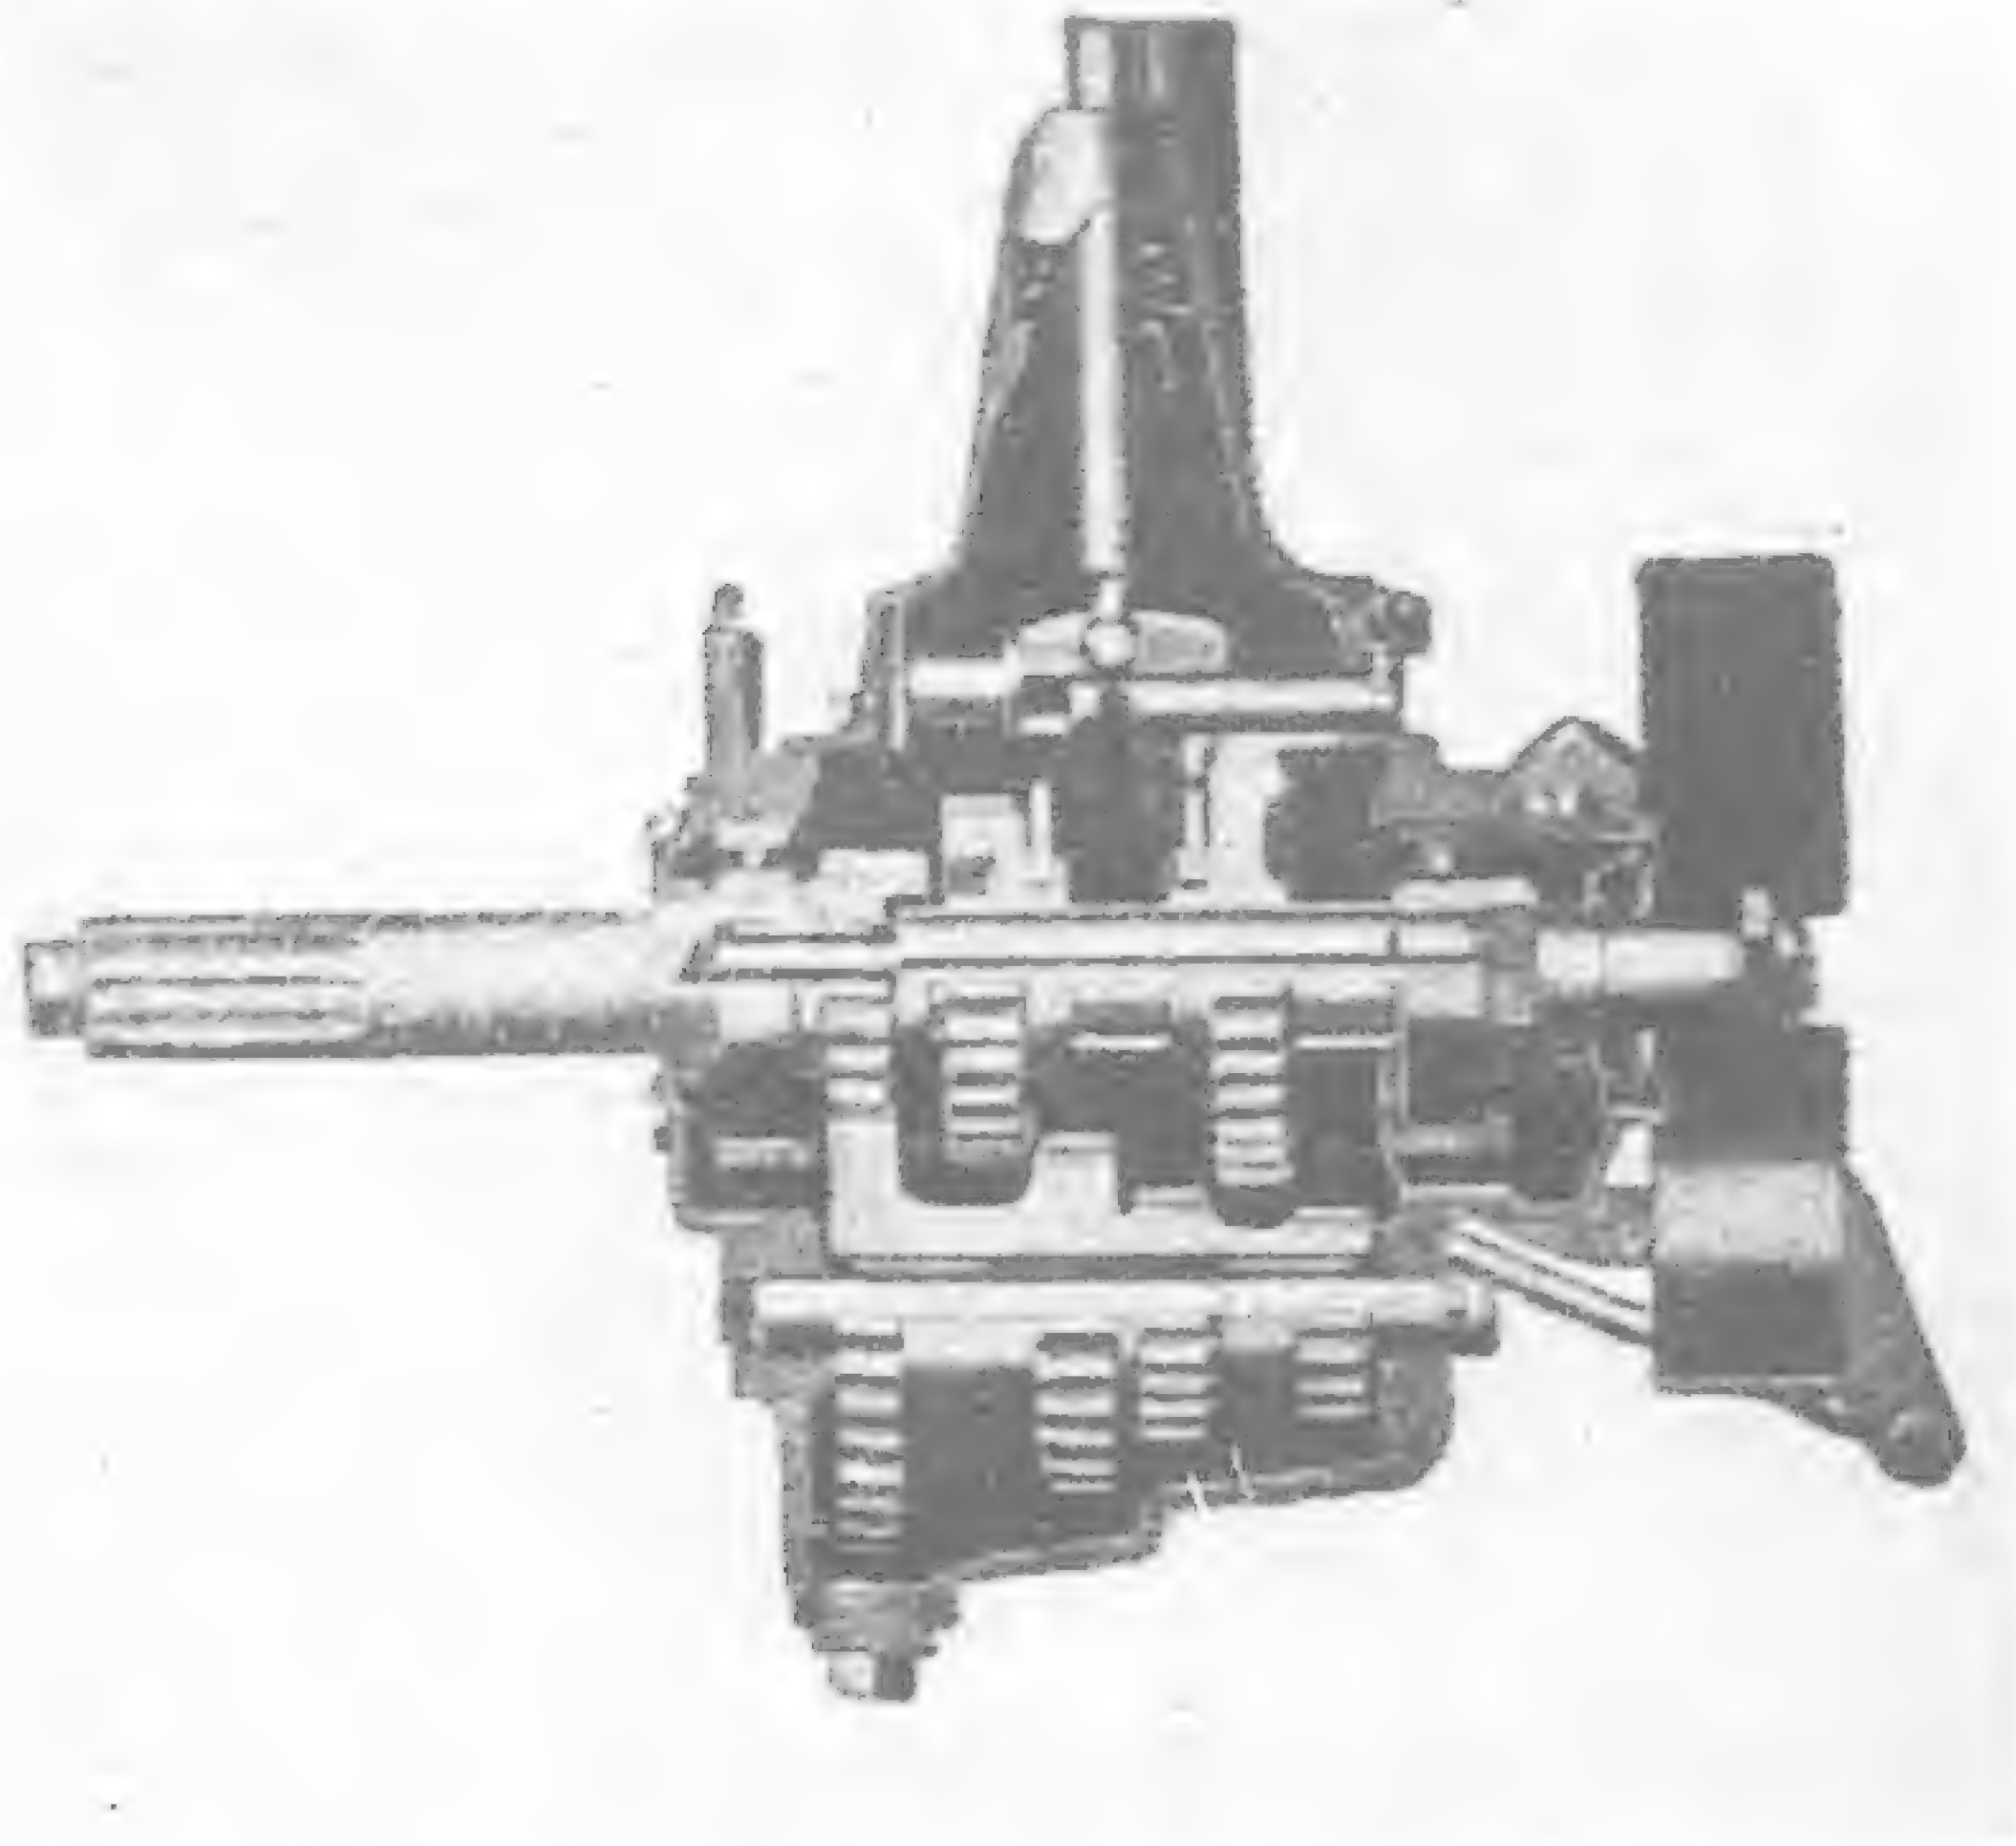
Transmission Assembly. All Gears and Shafts shown are Nickel Alloy Steel
